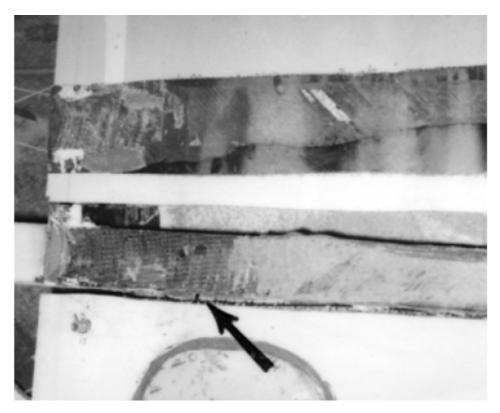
mating fracture surfaces of an adhesively bonded wing skin and wing spar showing transverse fractures on both surfaces \sim (x0.2) (ASM, 2001)
